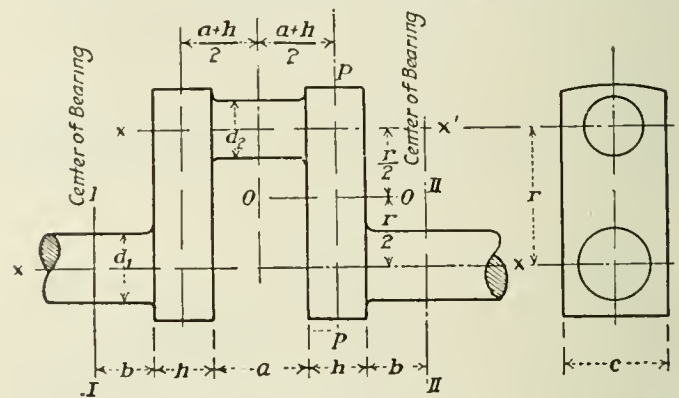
CONVENTIONAL TYPE OF SINGLE-CYLINDER, TWO-BEARING CRANK-SHAFT
